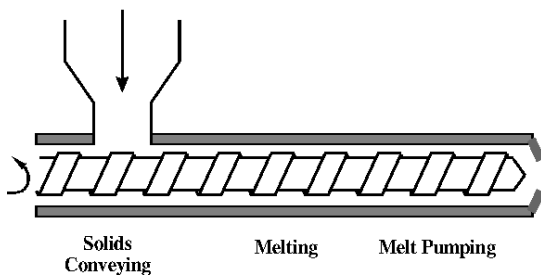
Illustration of polymer extrusion single-screw extruder
